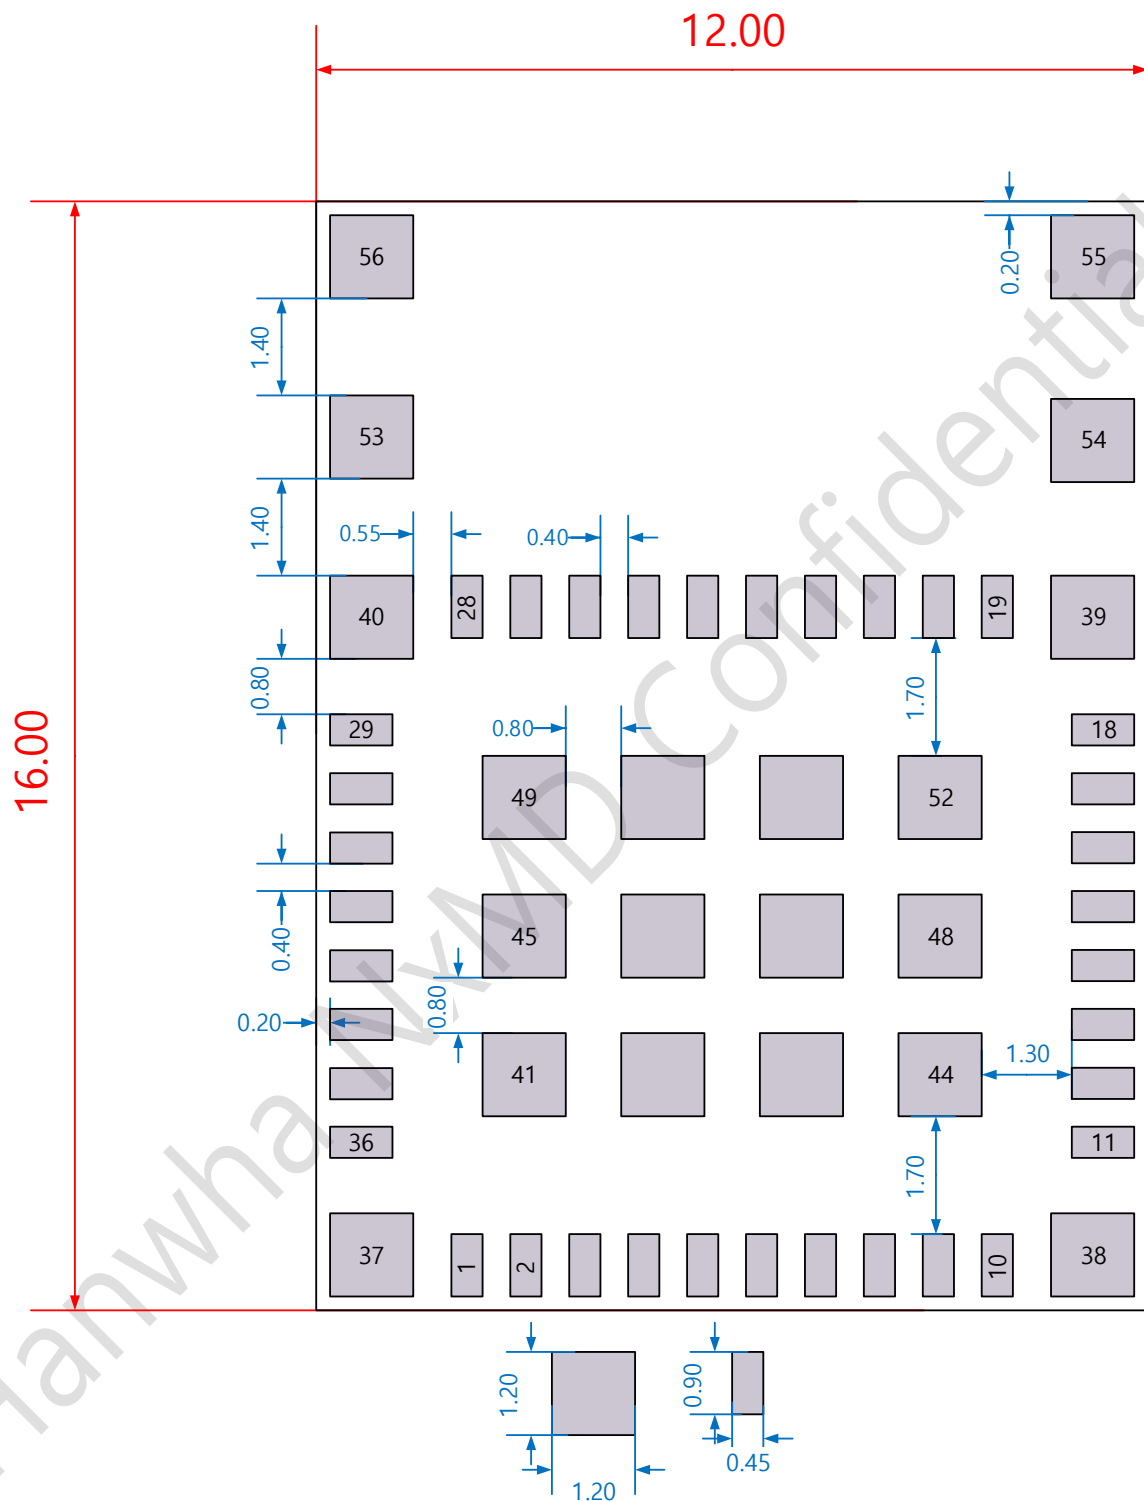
HWL-C21A Bottom Pad Dimension (Top View)
